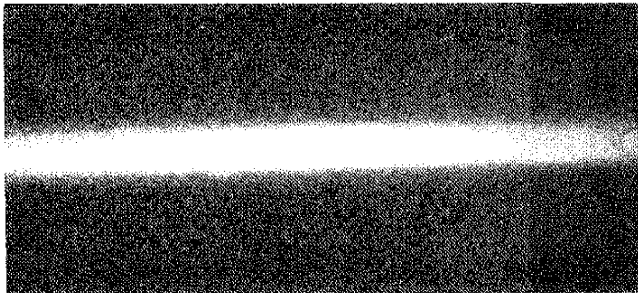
Radiograph showing centerline shrinkage in center of butt weld.
